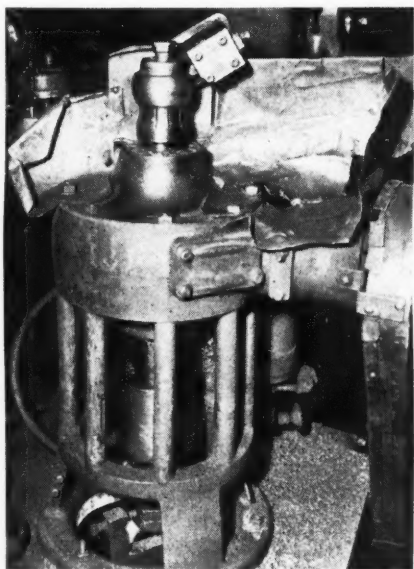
Close-up view of one of the spherical turning machines, showing the air-operated collet and air-actuated cutting tool for the rough cutting operation on ball rings. Devised by Charles L. Kessler, owner of the plant, the machine was built from a Nash automobile rear end. There are four of these machines in the battery.
